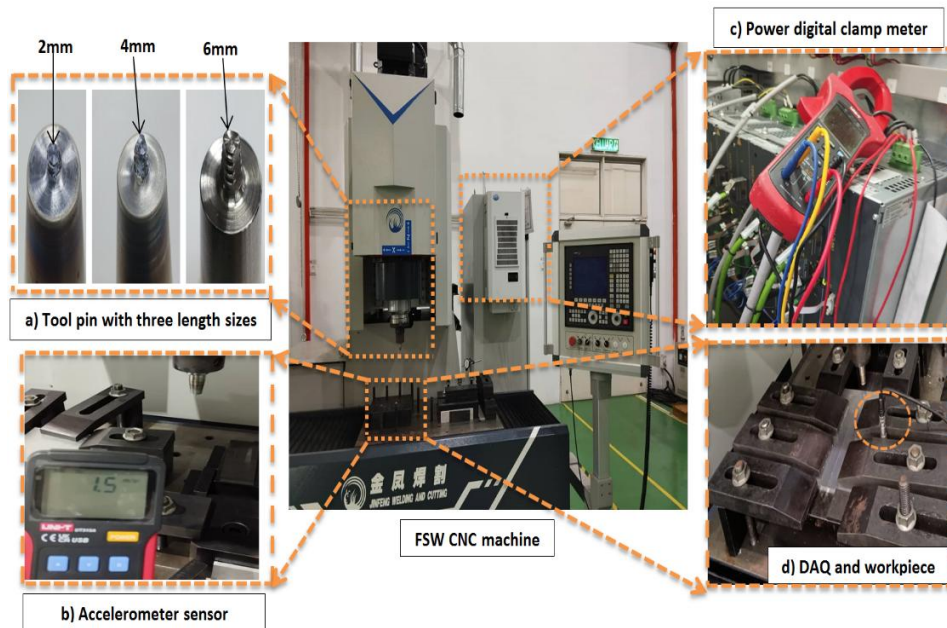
FSW machine set up and sensor position (a) Tool holder (b) A tri-axial accelerometer in Z-axis (c) Three-phase power supply line to the spindle motor (d) USB-6361 at a sampling rate of 10 kHz
